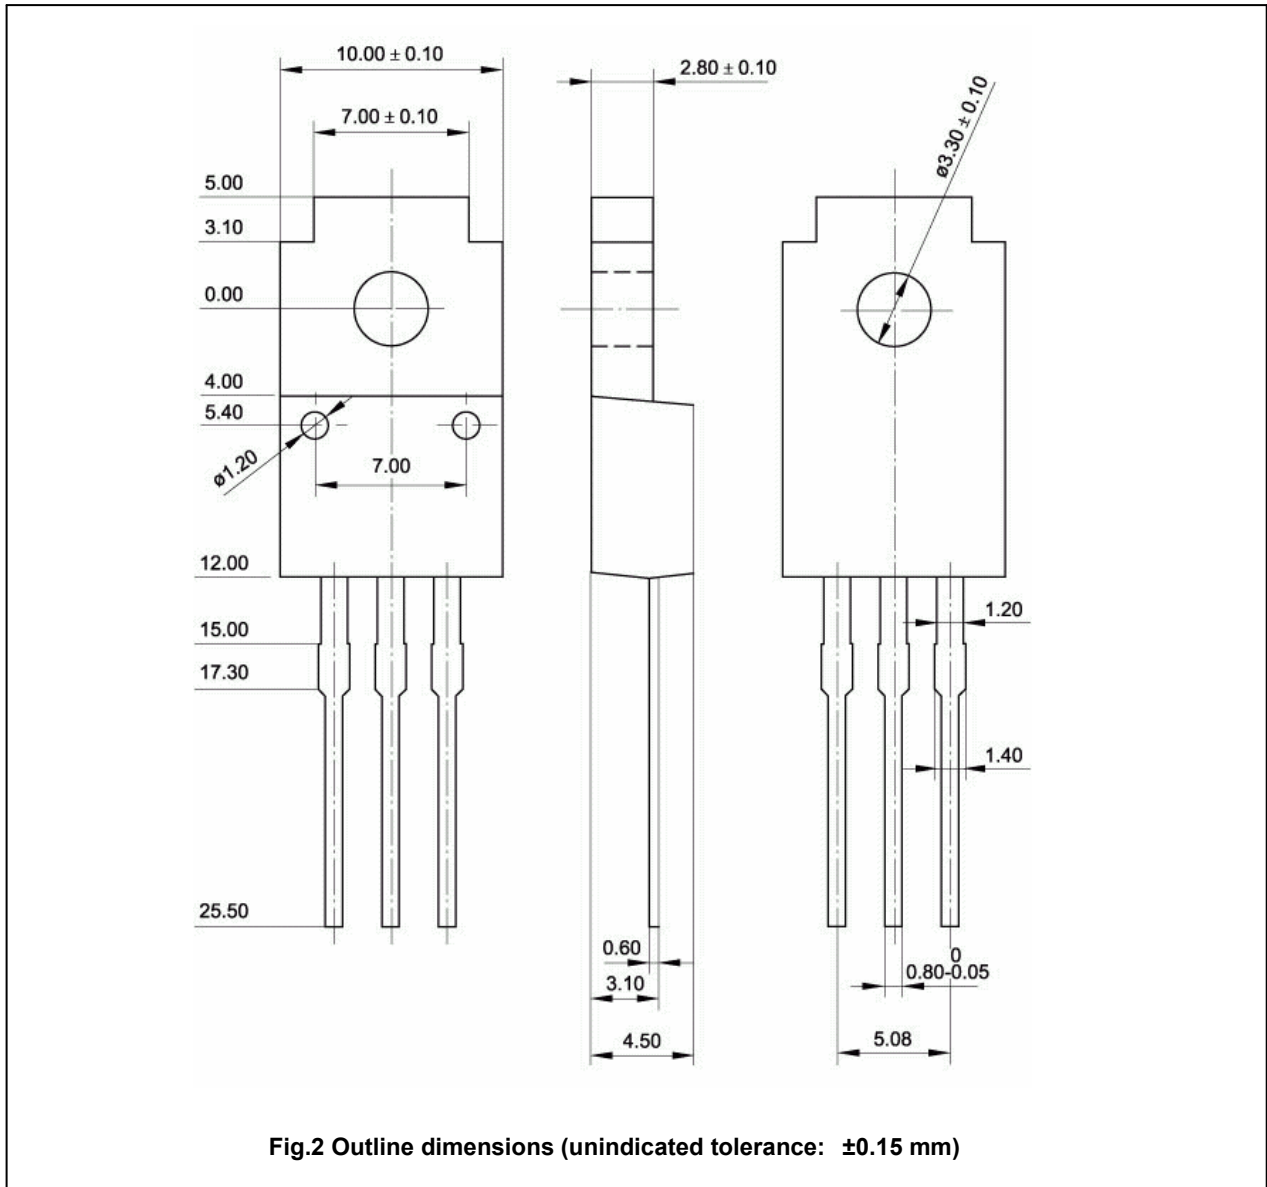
Outline dimensions (unindicated tolerance: ± 0.15 mm)
